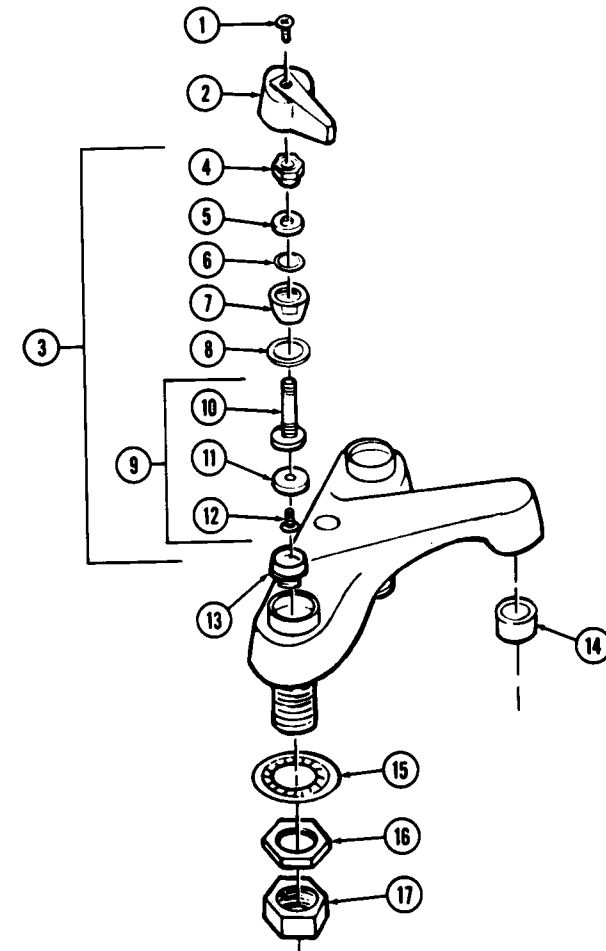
FAUCET ASSEMBLY WITH STANDARD SPOUT.
